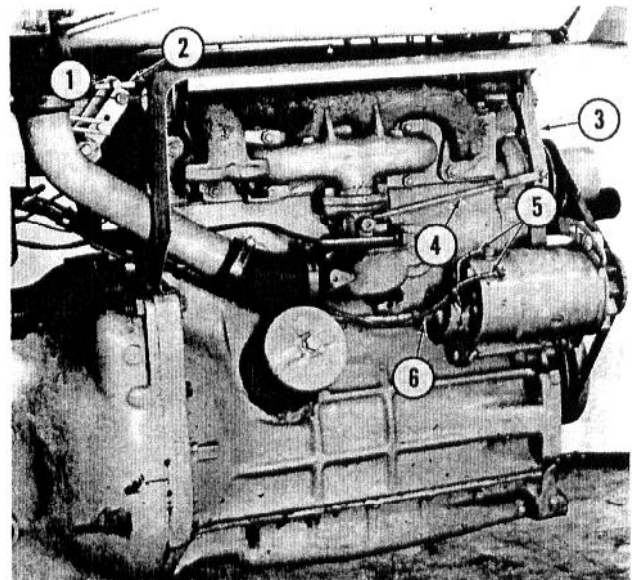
RIGHT-HAND VIEW OF GAS ENGINE SEPARATED FROM FRONT AXLE SUPPORT
